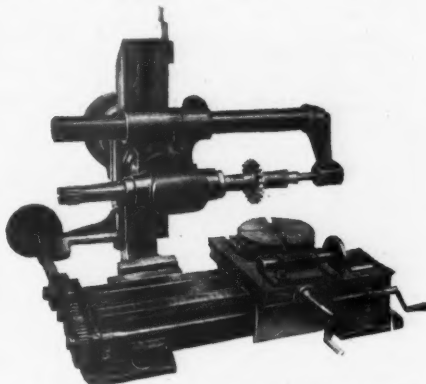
Combination tool called the Bench Machinist, which may be used as a lathe, milling machine and drill press
